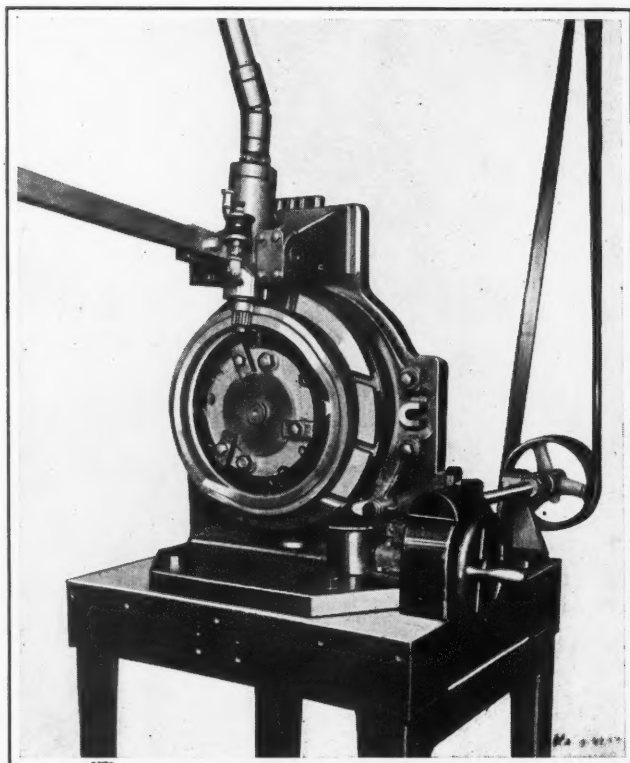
Single-purpose Cam Milling Machine for Cams of the Side-face Variety
